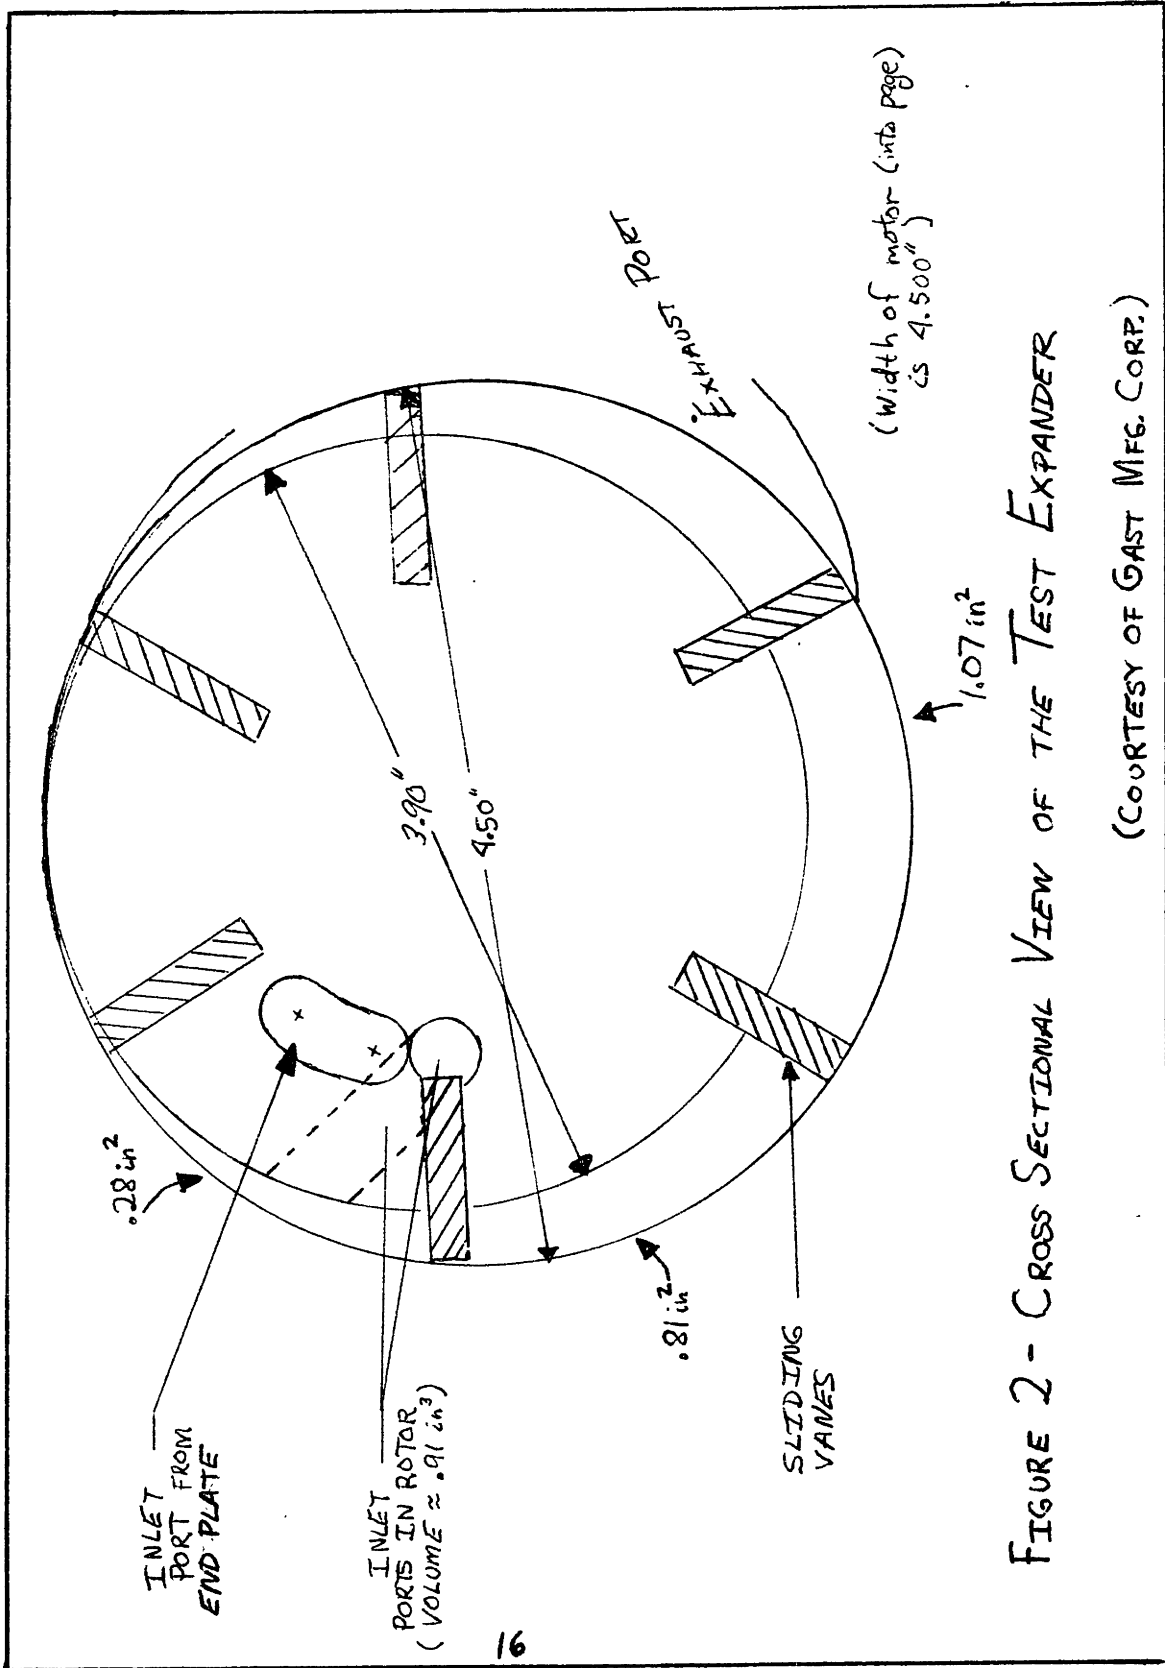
CROSS SECTIONAL VIEW OF THE TEST EXPANDER
